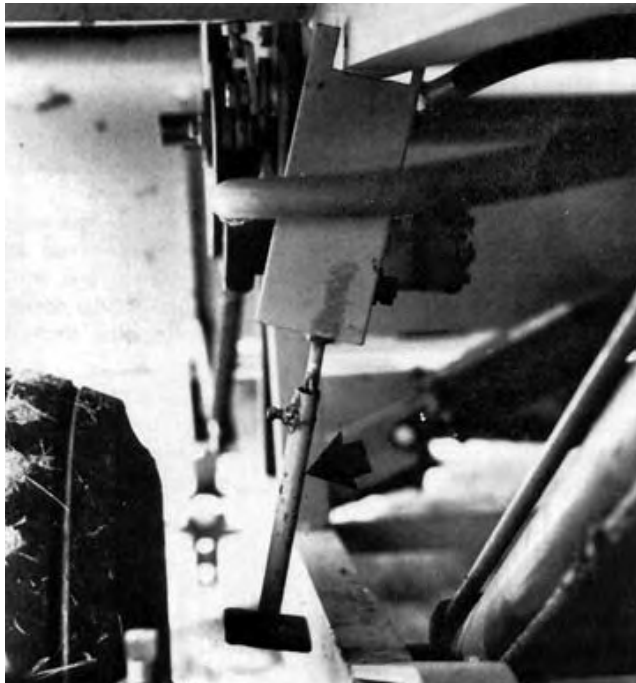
Load Deck Finger Activator Rod Misaligned with Main Frame.
